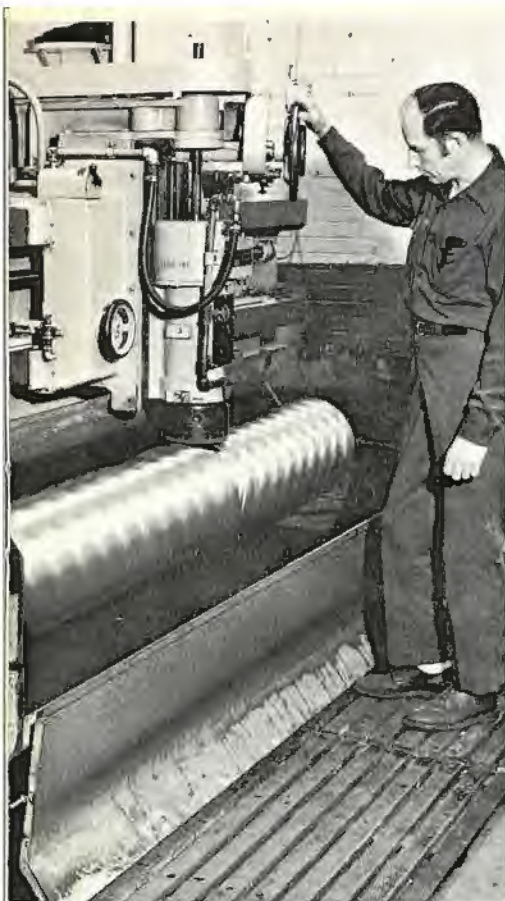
Larry Pfeil of Art Gravure operates the grinding machine to prepare the copper deposit to a smooth finish prior to engraving.
